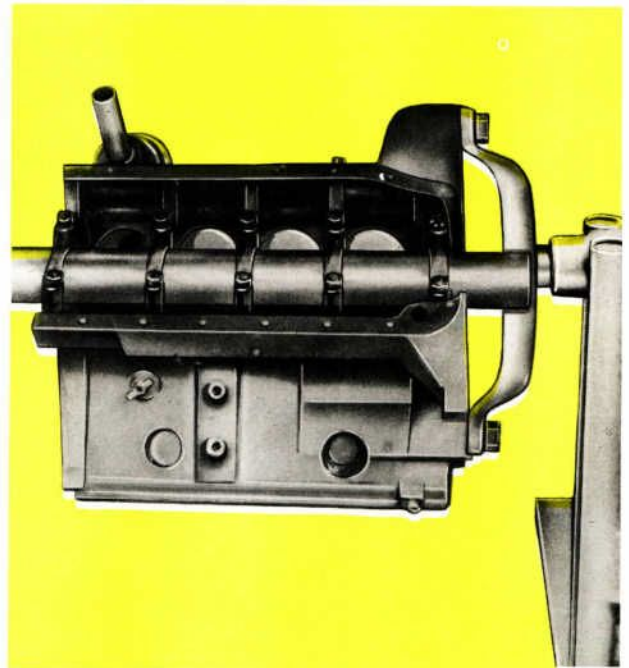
CHECKING MAIN BEARING BORE ALIGNMENT
